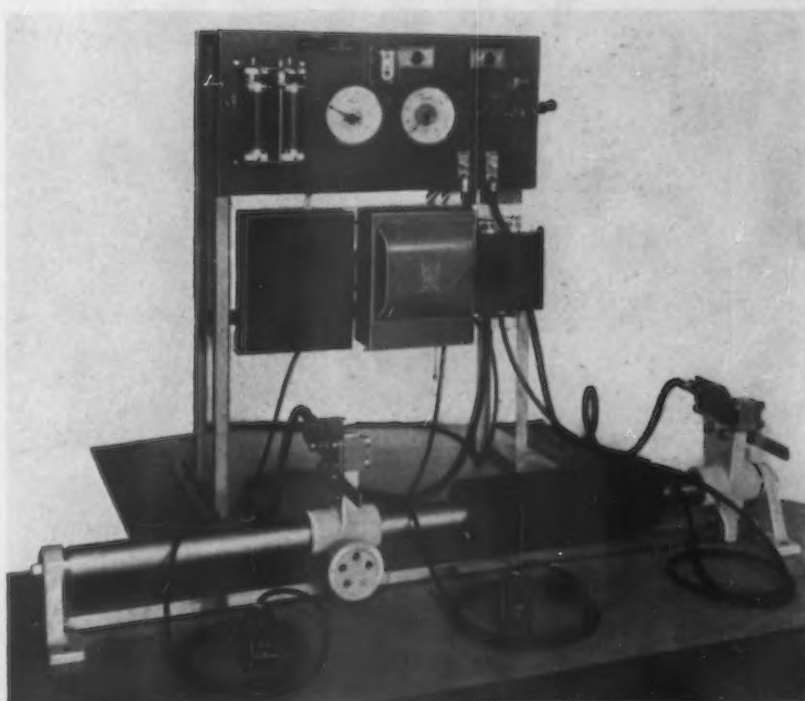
Magnetizing equipment for Magnaflux inspection of crankshafts.
